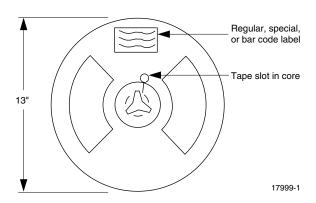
Tape and Reel Shipping Medium (1000 units per reel)
